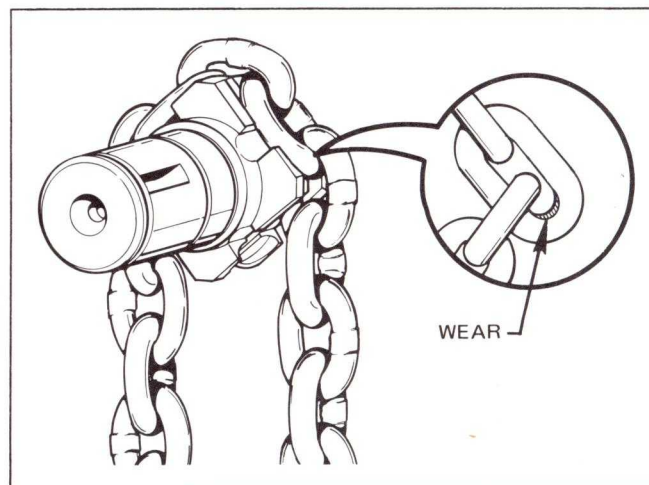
Check Chain Wear at Bearing Surfaces Between Links.
